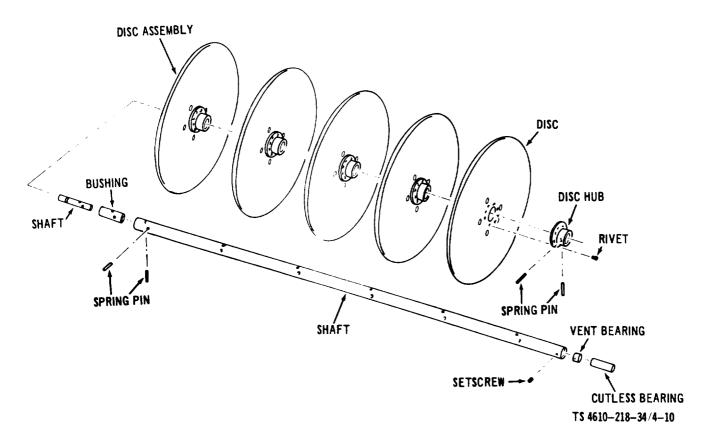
Erdlator Agitator Shaft Assembly, Disassembly and Reassembly
